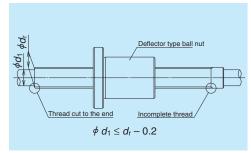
Shaft end of a deflector recirculation system ball screw
